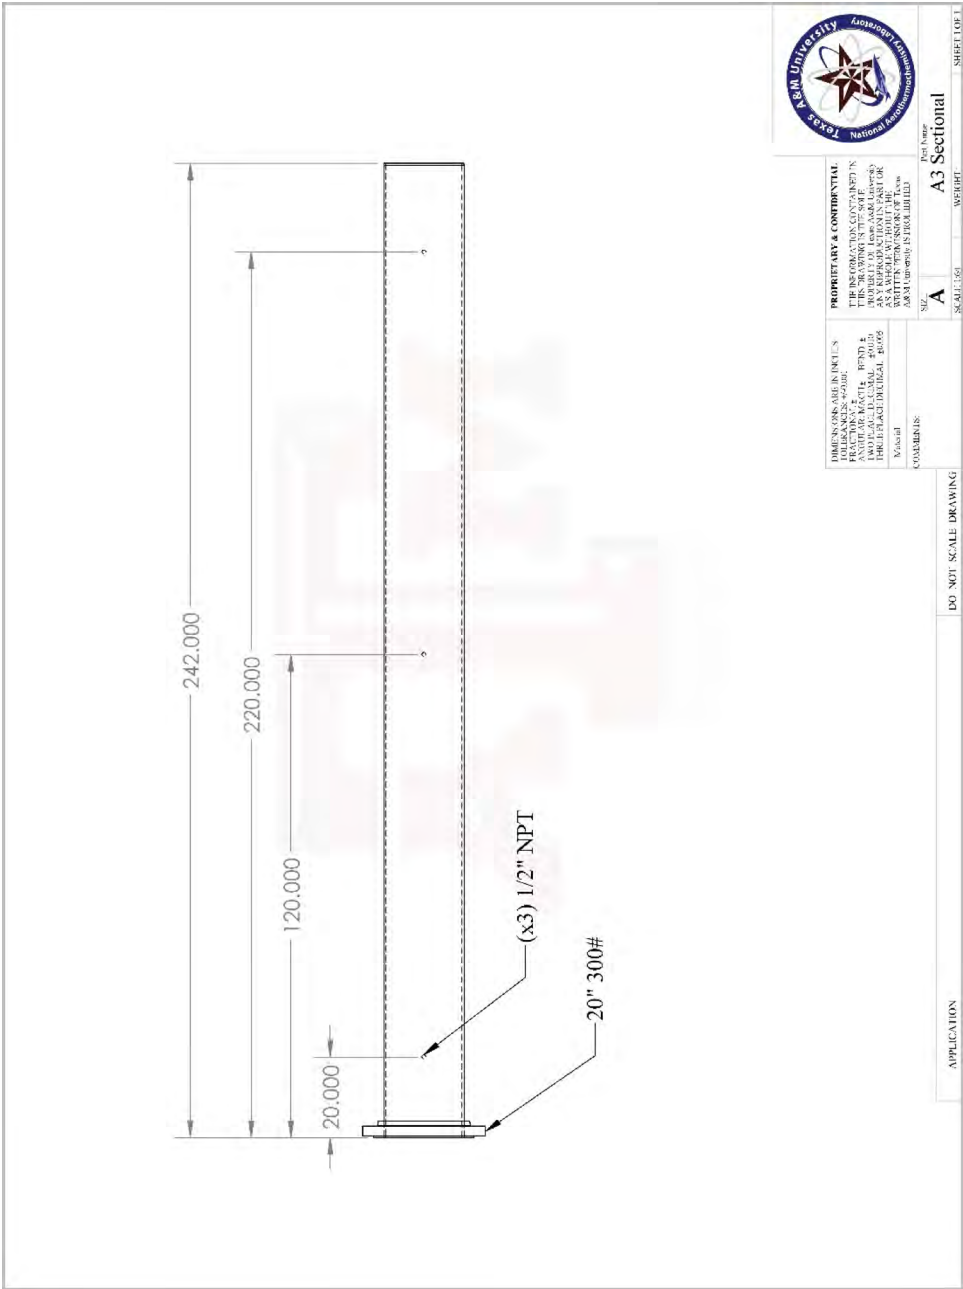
THIRD ACCELERATOR SECTION DRAWING SUBMITTED TO CIRCLE H MANUFACTURING FOR ASME CERTIFIED HIGH PRESSURE WELDING.
